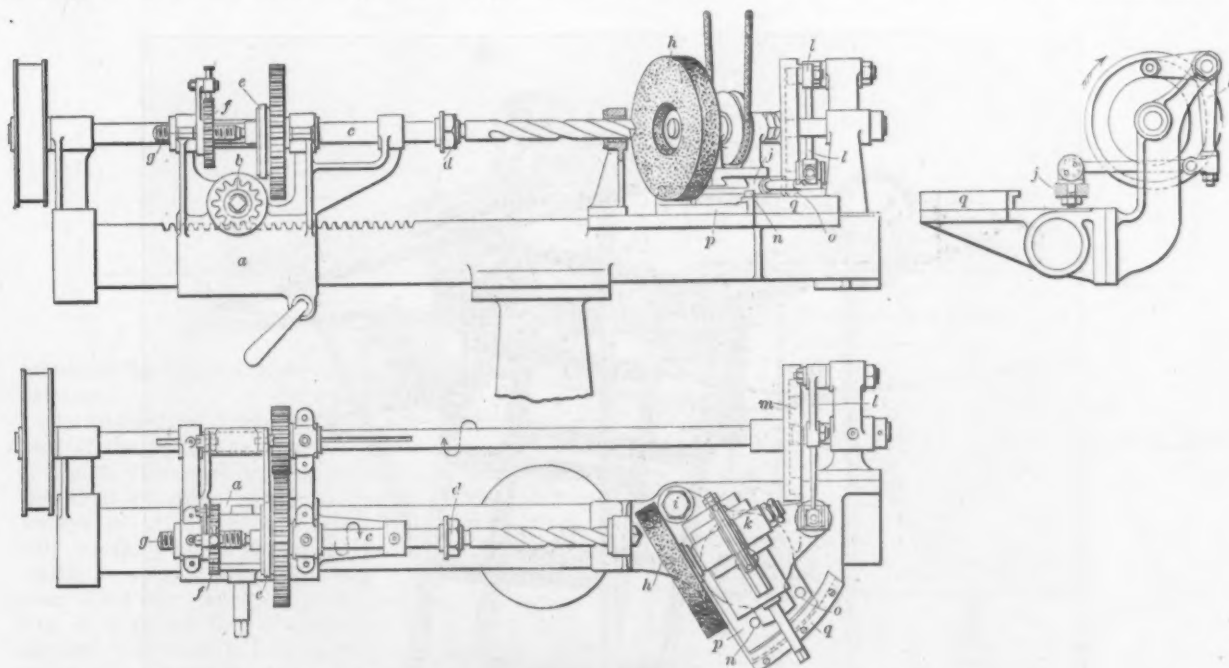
Front and End Elevations and Plan of the Dahl Automatic Drill Grinder.
